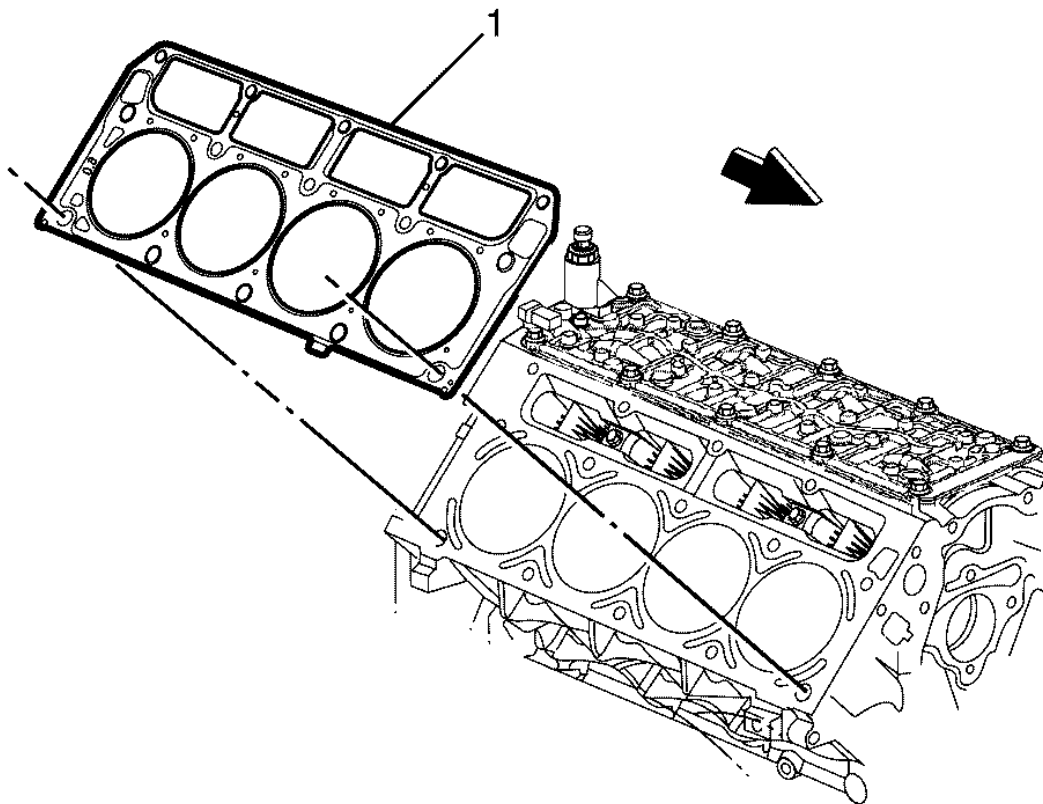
Identifying Cylinder Head Gasket (Right Side)
